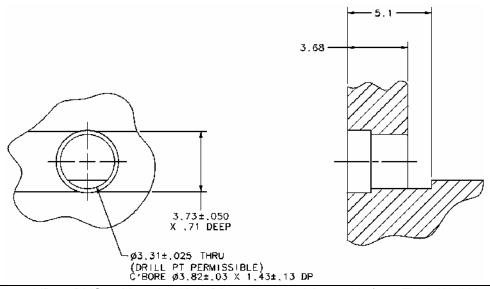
VP100BMS75 Mounting Hole Dimensions and Assembly for a Thick-Wall Housing
